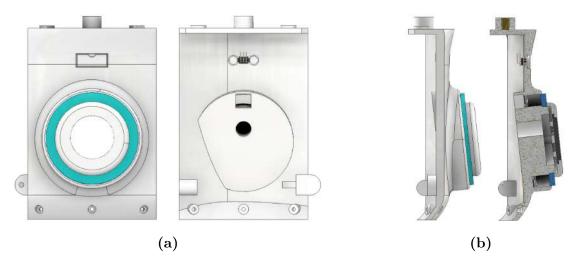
Details of the head lateral panels: (a) Front and back views, (b) Side view and cut view.
